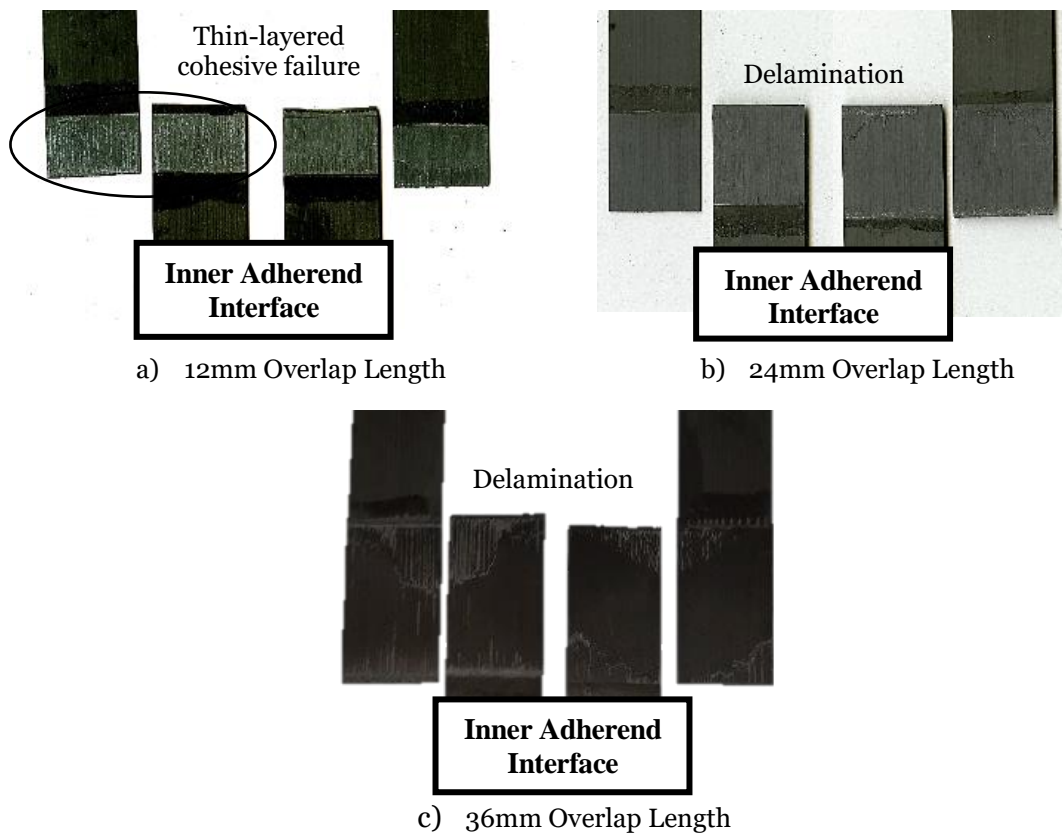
Fracture surfaces for 2mm inner adherend cases at HTW
